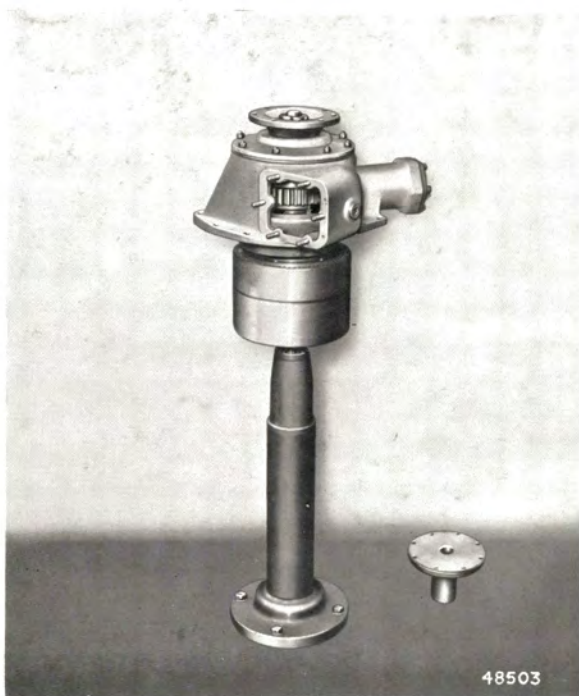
FRONT COVER ASSEMBLY IN STAND
